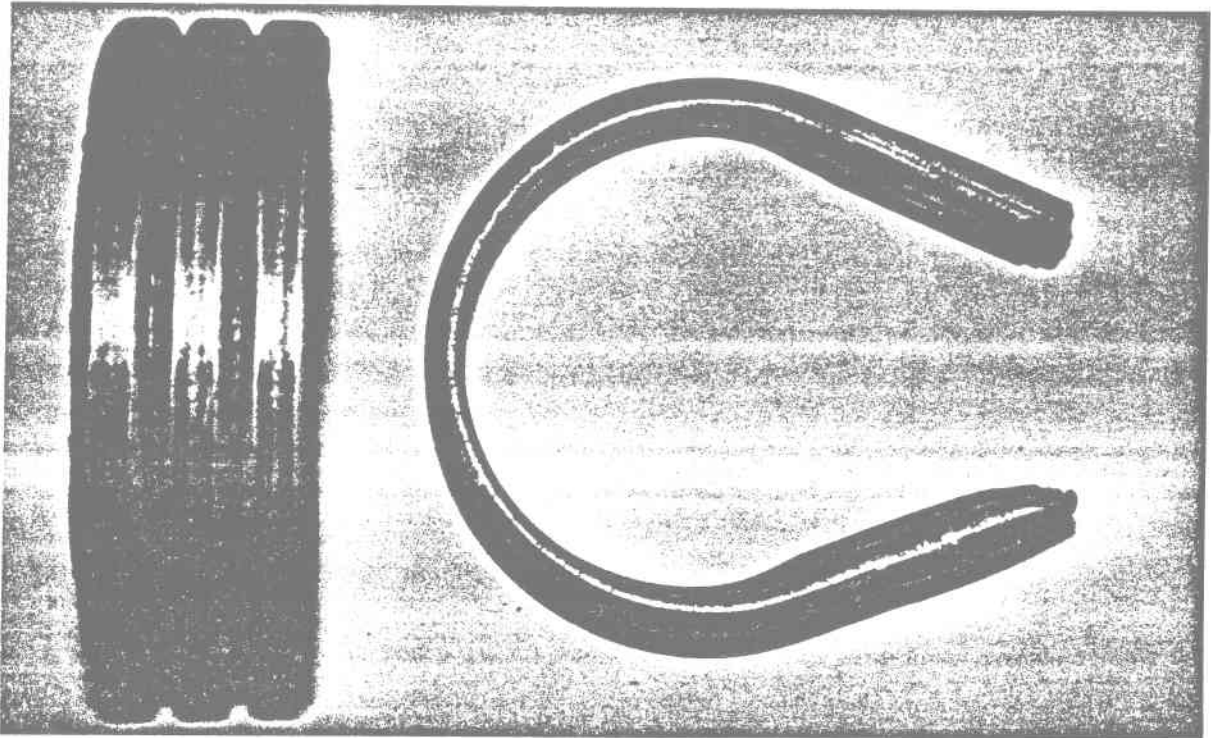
Top and Side Views of One of Two Longitudinal Bend Test Specimens
